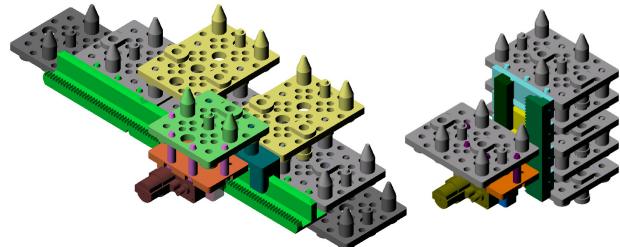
Multiple components can be assembled into trusses and columns, which in turn can be augmented with additional parts to form horizontal and vertical tracks on which motorized components can move.
